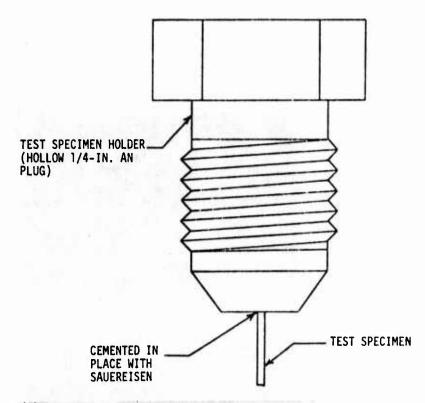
Schematic of Test Specimen Holder with Test Specimen in Place
